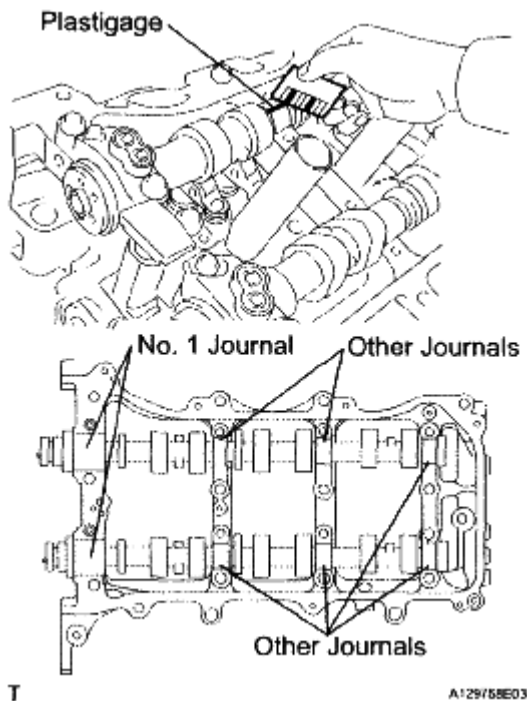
Measuring Plastigage At Camshaft Widest Point
